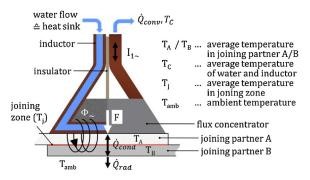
The hybrid Induction Contact Joining (ICJ) tool and main parameters.
